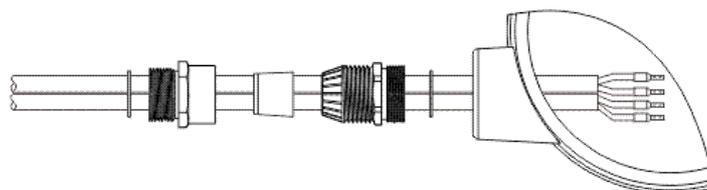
1 Schematic diagram of double hole sealed cable threading (applicable wire diameter 3-5mm)71
